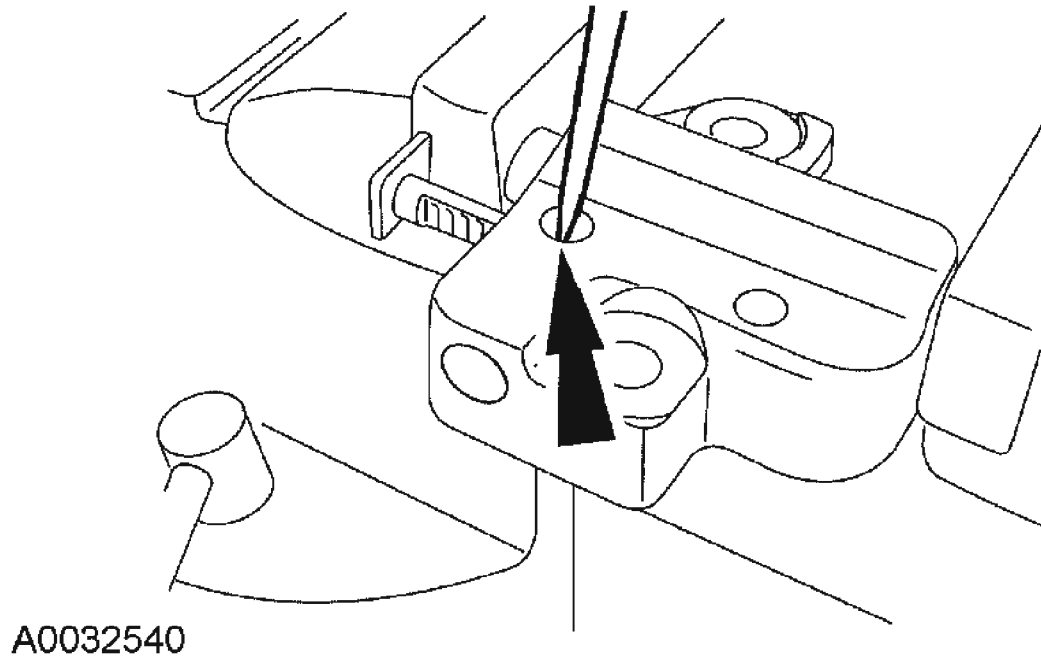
Using A Small Pick To Push Back And Hold Ratchet Mechanism
